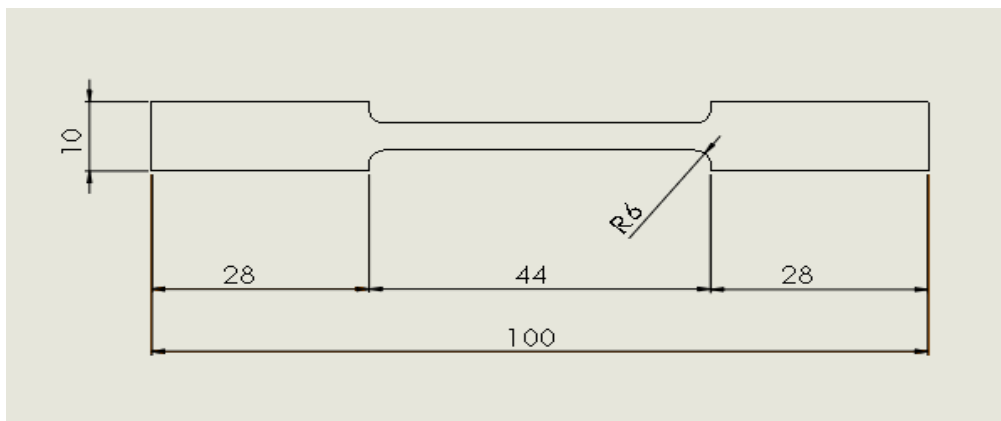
Tensile test specimen with overall dimensions in millimeters.
